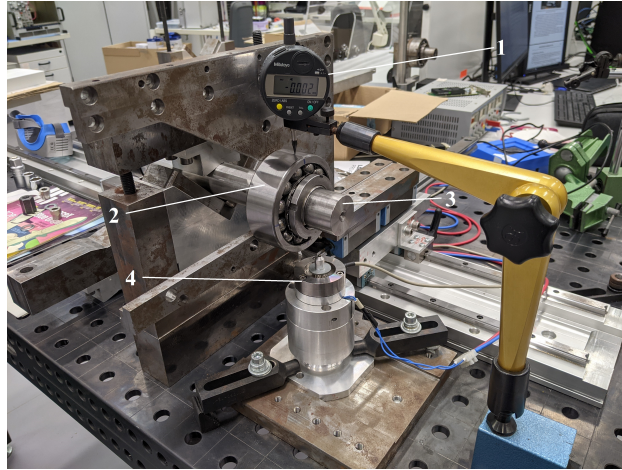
Automated system with the automatic radial internal clearance after mounting with measured ball bearing NTN 2309SK. 1 - dial gauge, 2 - seated bearing, 3 - shaft, 4 - electromagnetic actuator and holder.
